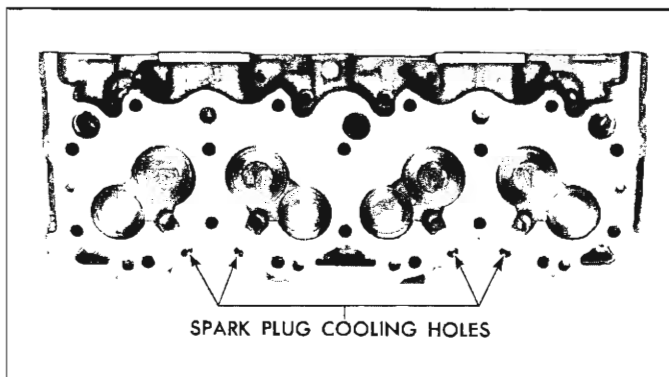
Cylinder Head Spark Plug Cooling Holes
